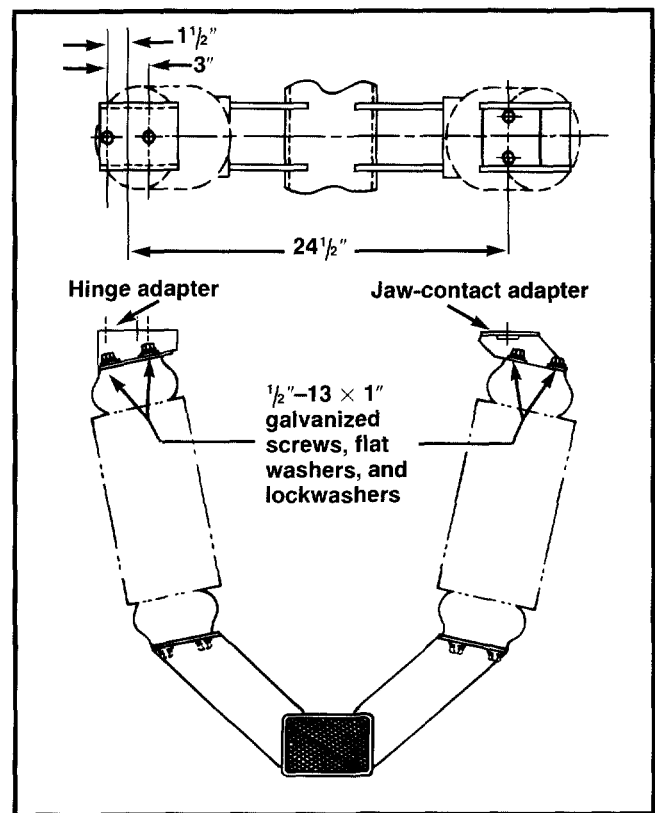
Hinge and jaw-contact adapter alignment detail. Typical for switches rated 25/34.5 kv and 34.5 kv, 600 amperes and 1200 amperes.
